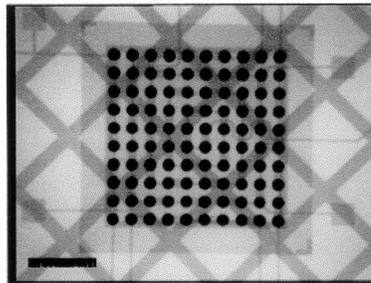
CSP replacement part with solder ball addition prior to reattachment on PCB.
